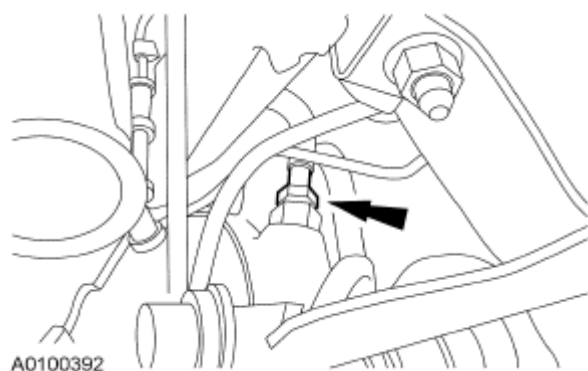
Locating Rear Transmission Fluid Cooler Tube
